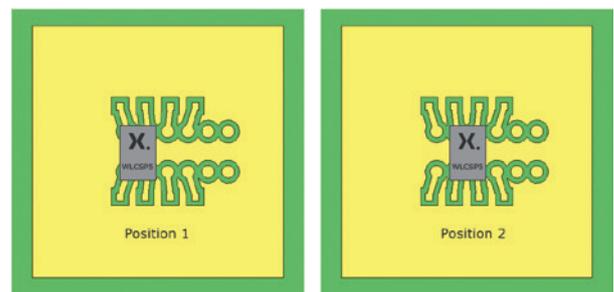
Placement of PCMF on measurement PCB showing position 1 and position 2
